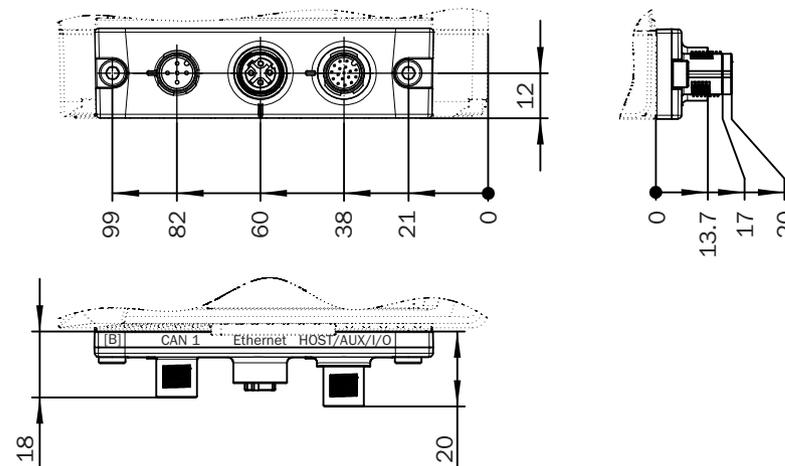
Dimensions of cloning plug B (M12), all dimensions in mm
